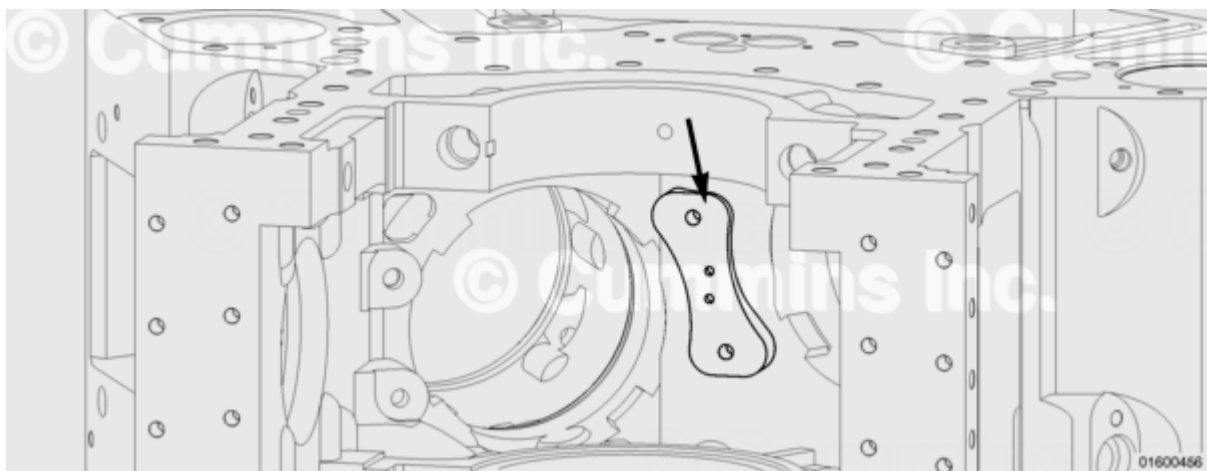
Upper Piston Cooling Nozzle Mounting Pad
